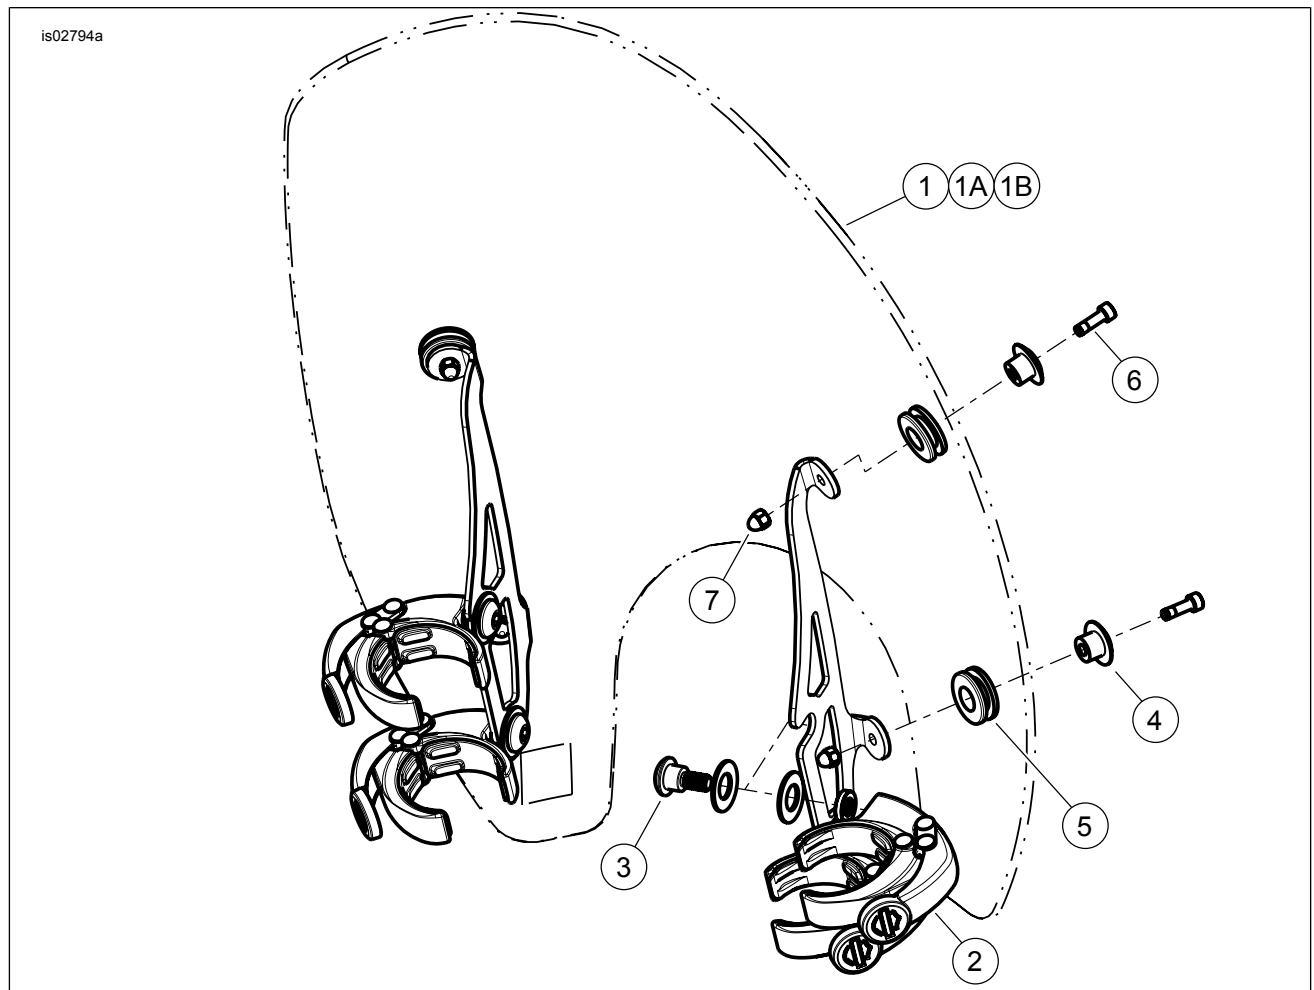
Service Parts: Super Sport Quick-Release Windshield Kit
